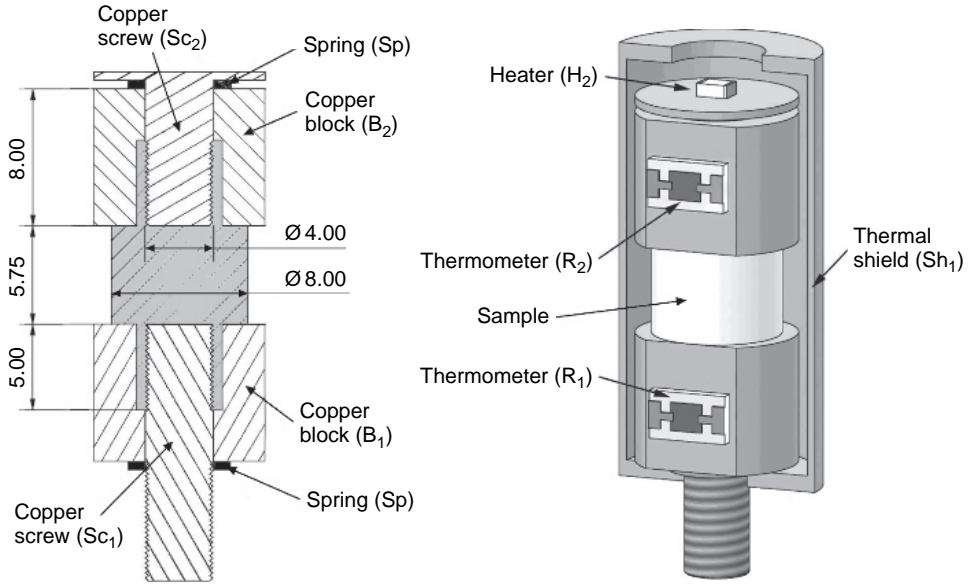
Shape and size of the sample (mm) and view of the sample holders.
